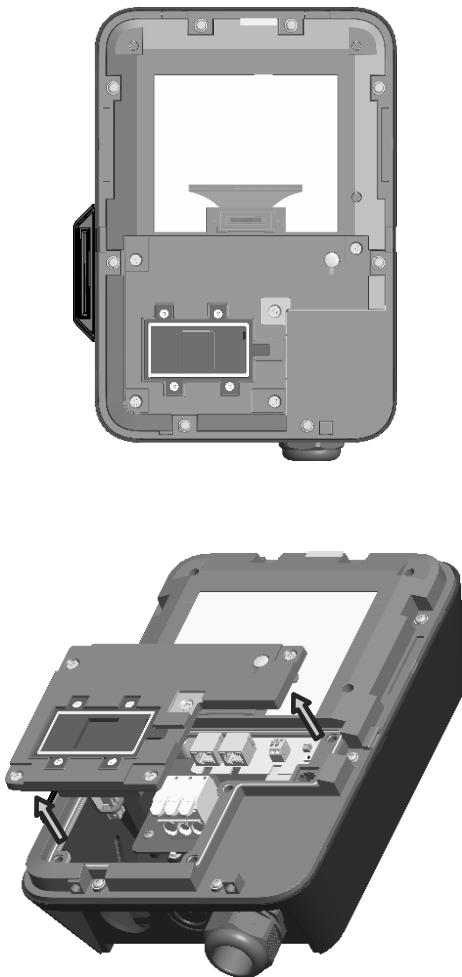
Loosen 4 Pcs M4 Screw Then Open Install Cover
